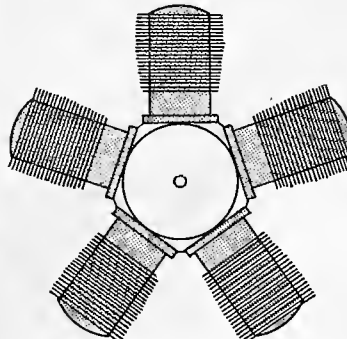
Five-cylinder  $50 \times 50$  mm. bore and stroke.
